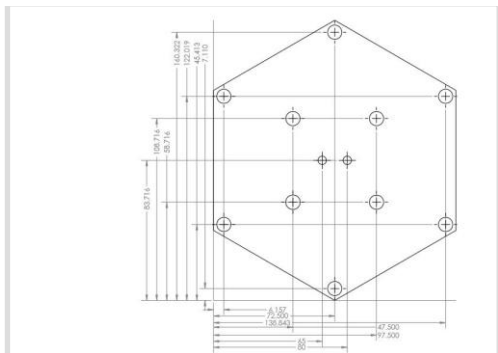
The Top and Bottom Part of the Sandwich Jig.
